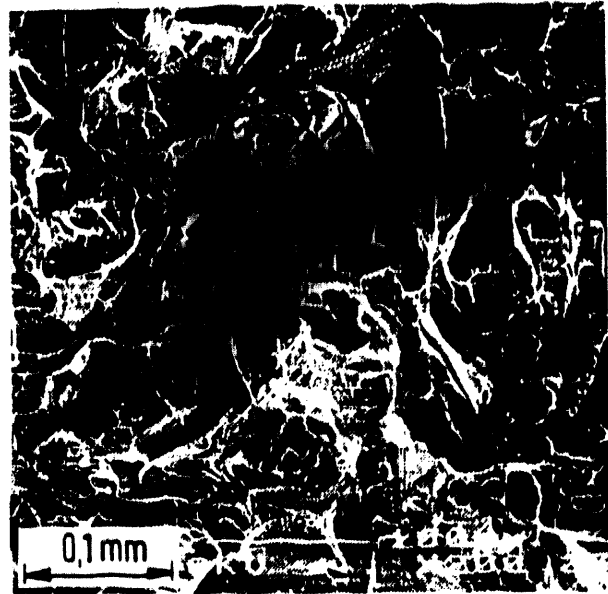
Fracture surface of bottom half : specimen GP 1
